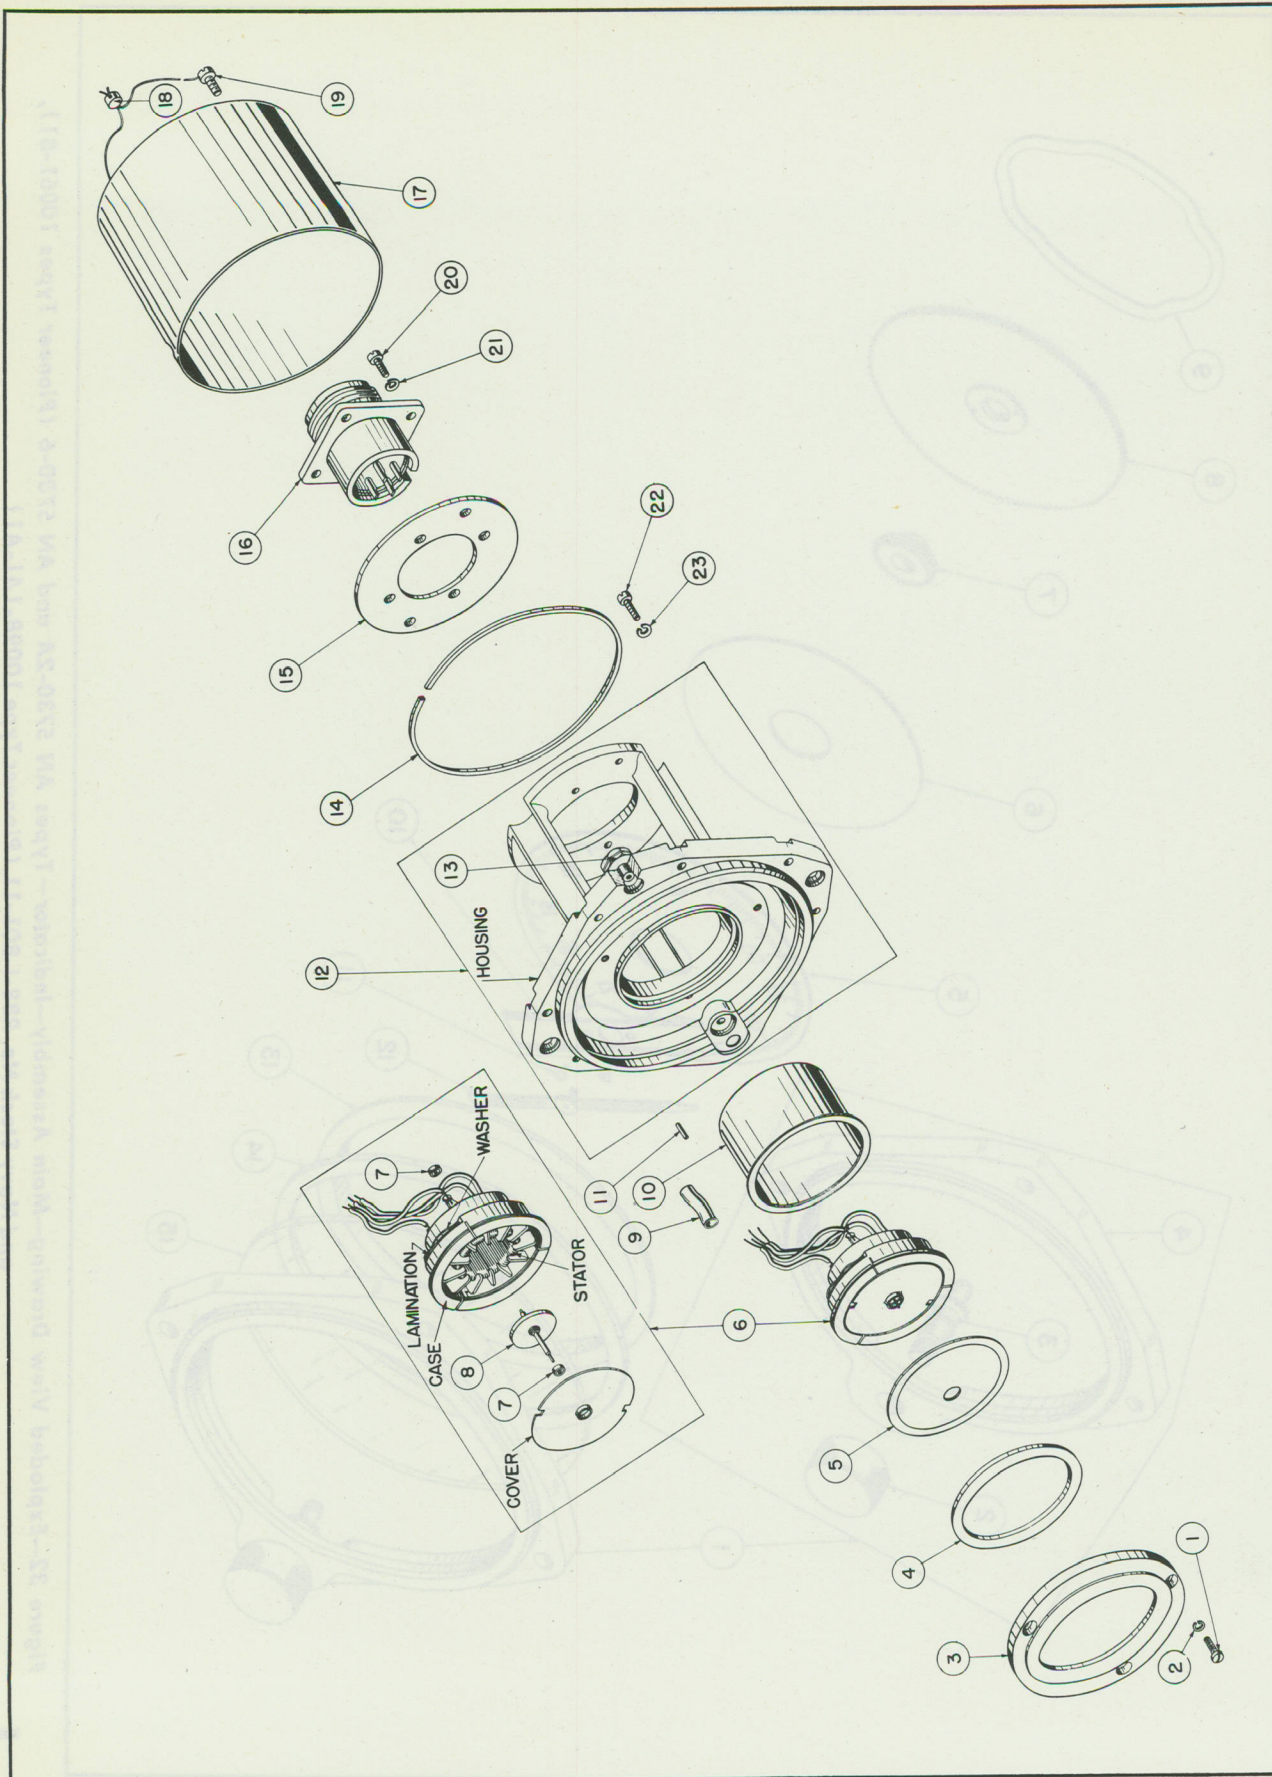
Exploded View Drawing—Main Assembly—Indicator—Types AN 5730-2A and AN 5730-6 (Pioneer Types 10061-B1),
